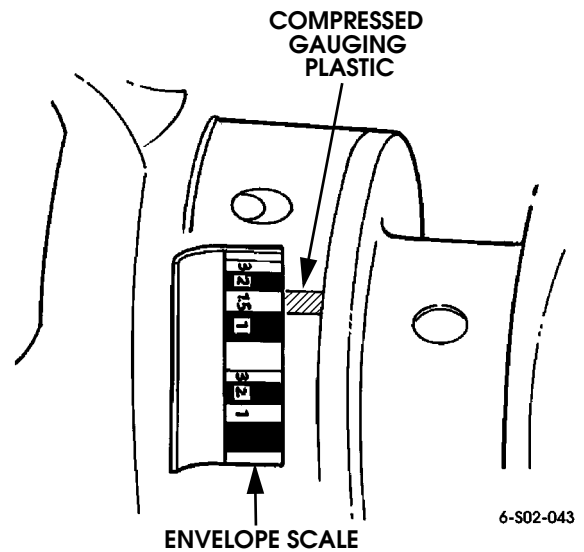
Measuring Gauging Plastic to Determine Bearing Clearance
